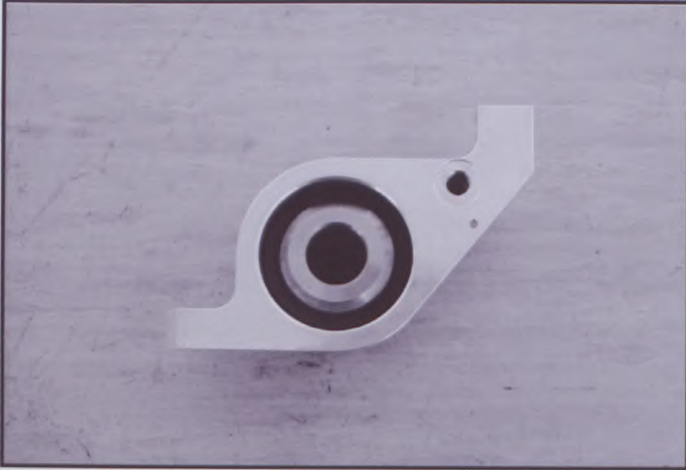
Front stabilizer mounted in ENG room
